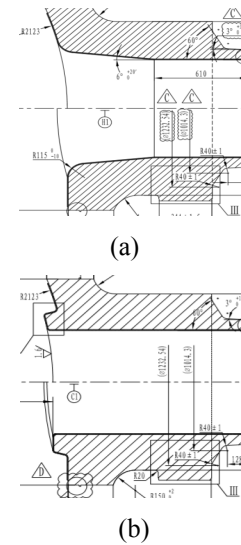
Inspection zones on the inner radius of RPV nozzles
